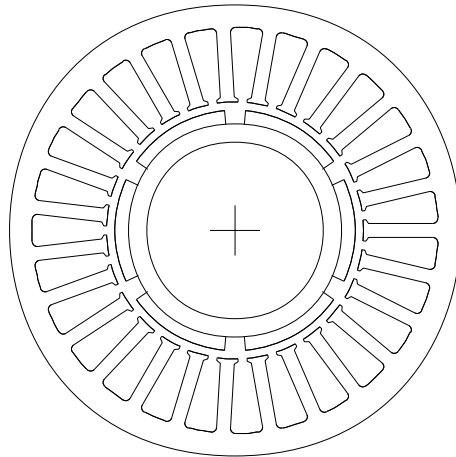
The concept of a new machine with rectangular magnets and a tube rotor.
